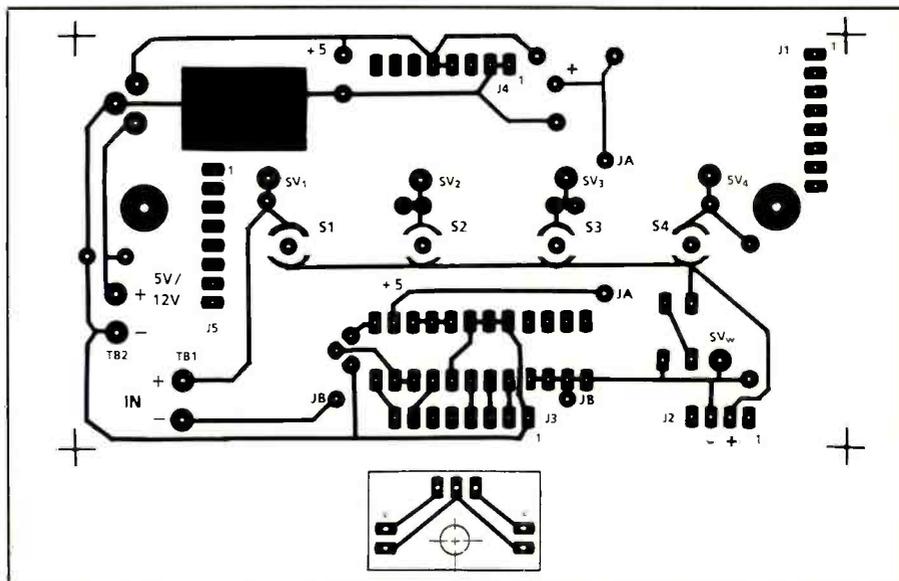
Actual-size etching and drilling guides for DigiVolt-DC main (a) and LED display (b) printed-circuit boards.
